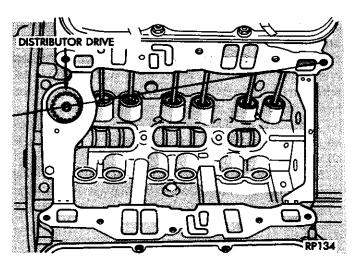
Position of Installed Distributor Drive Gear INSTALLATION (DISTRIBUTOR)
